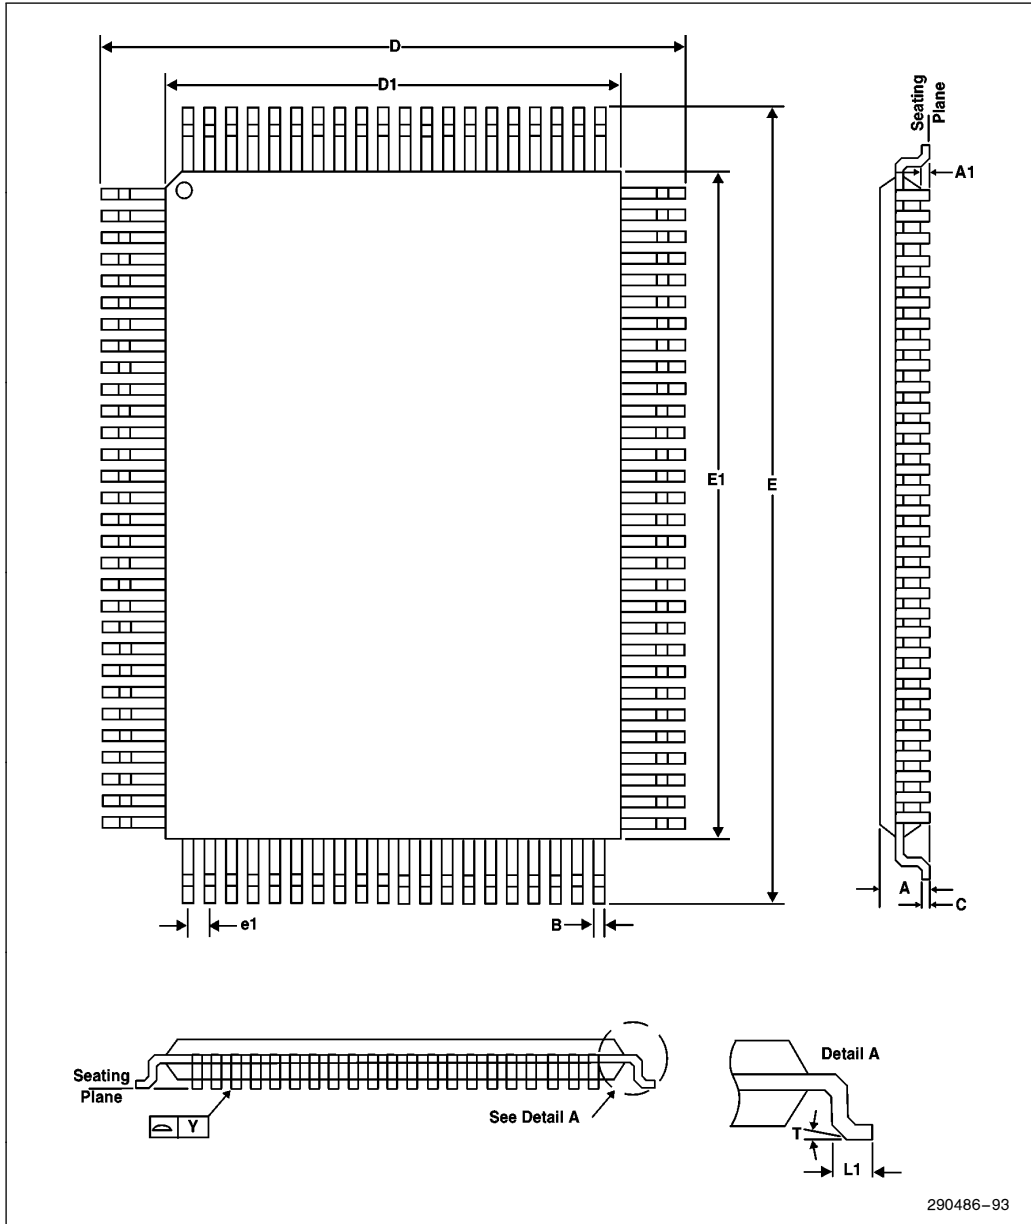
100-Pin Quad Flat Pack (QFP) Dimensions
